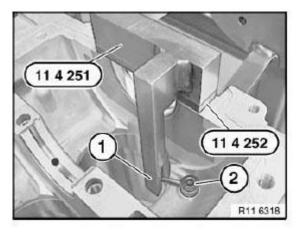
Identifying Oil Spray Nozzle And Special Tool Courtesy of BMW OF NORTH AMERICA, INC.
